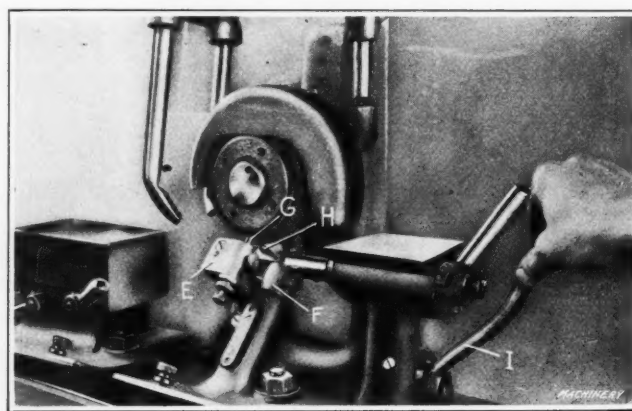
Wheel Truing Device shown in Fig. 27 set for truing Sides of Grinding Wheel
